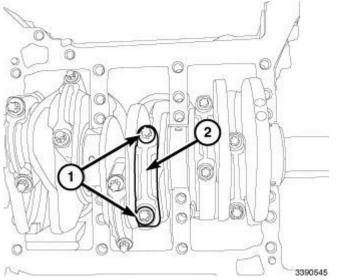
Connecting Rods Bearing Cap & Bolts Courtesy of CHRYSLER GROUP, LLC
